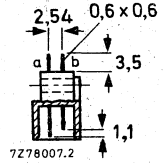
Straight dip-solder pins, with protruding earth contacts.
